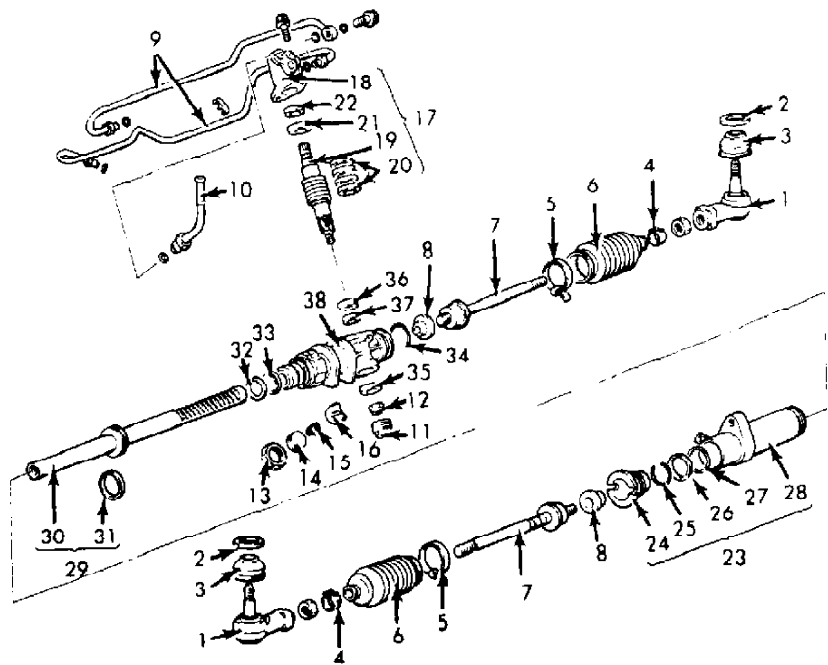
Exploded View Of Power Rack & Pinion Assembly (Typical)
